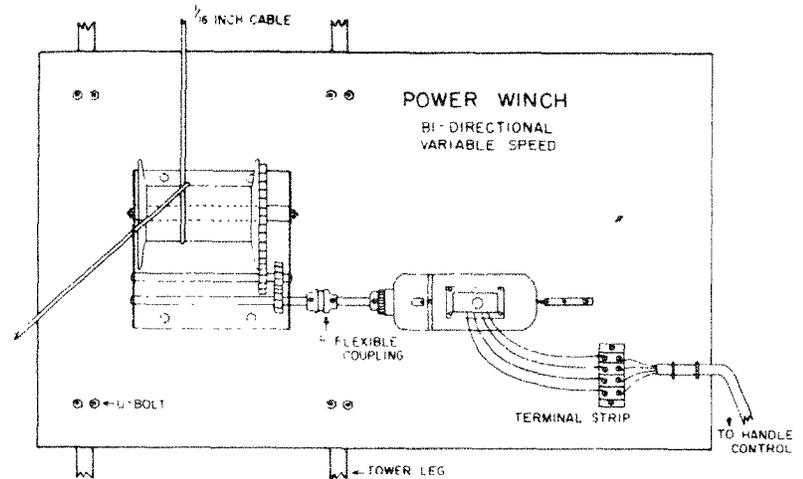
A power winch built from a 1/2-inch electric drill and a light boat winch was used to move the instruments along the tramway.
